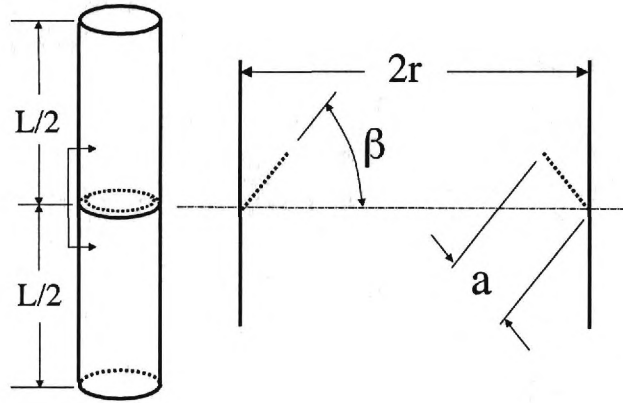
Sketch of inclined circumferential crack (ICC) specimen configuration and dimensions.
